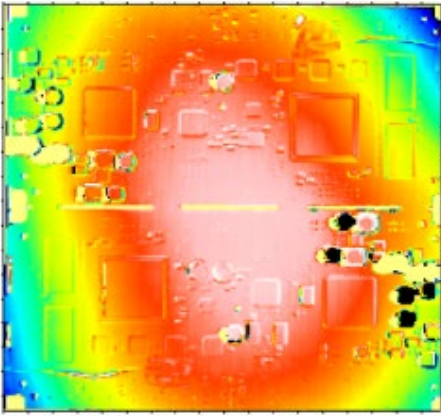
Deformation Measurement of Panel with BGA Defects
